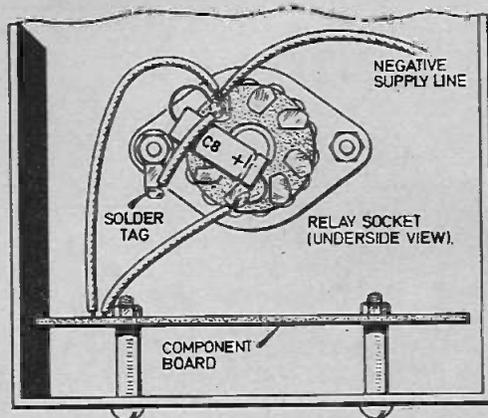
Wiring of RLA1 and C8 to the circuit panel. RLA1 socket has been mounted in the case side so that space is left inside the case for a battery or power supply.
